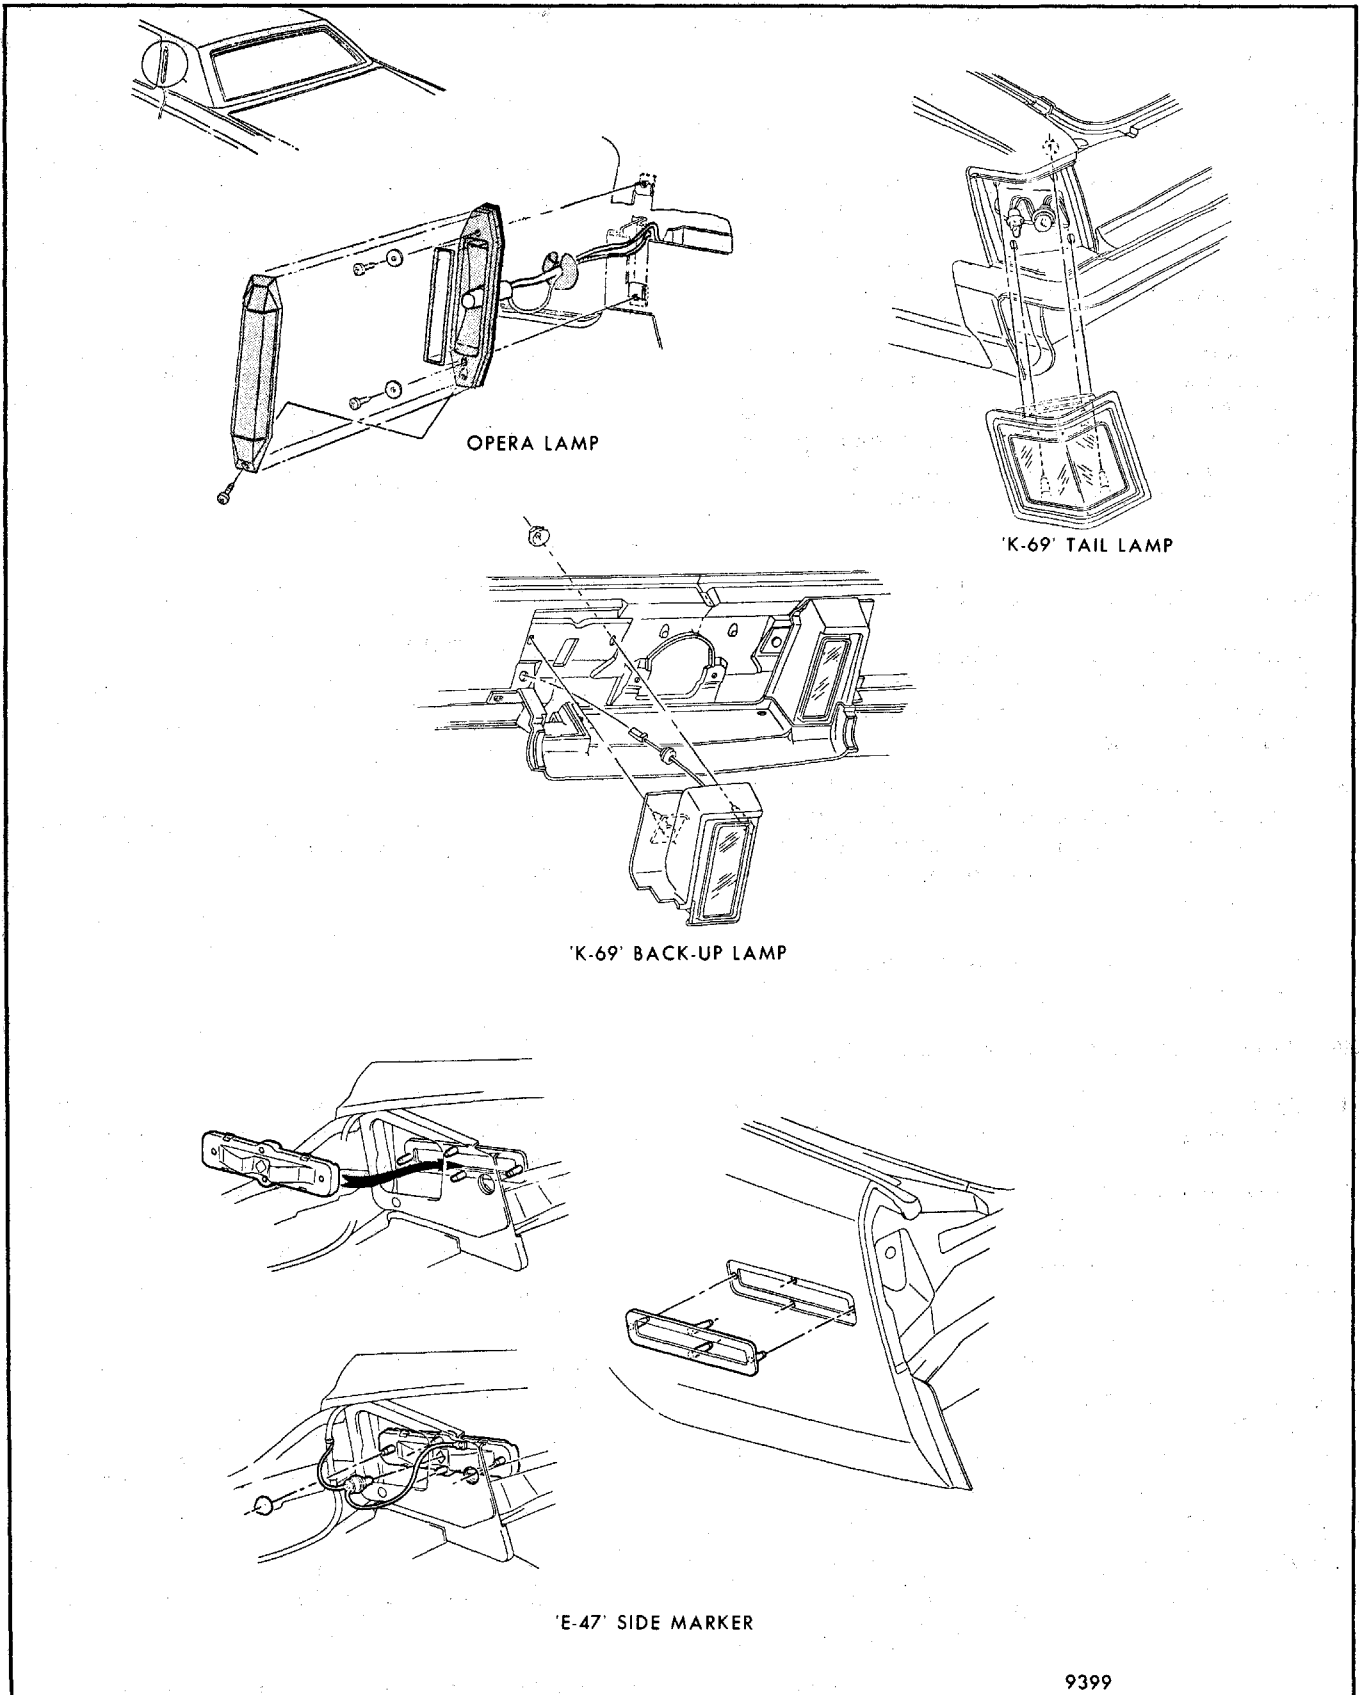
Exterior Lamp Installation - Cadillac Styles
